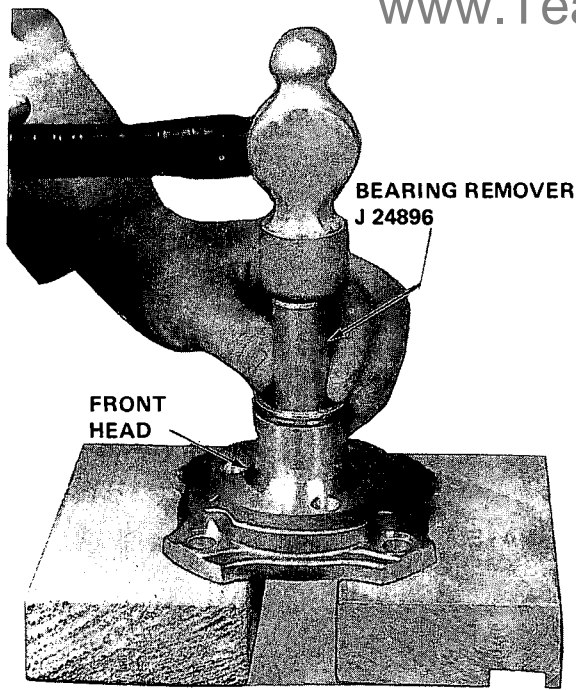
B-51 - Driving the Main Bearing Out of the Front Head - 4 Cylinder Compressor
